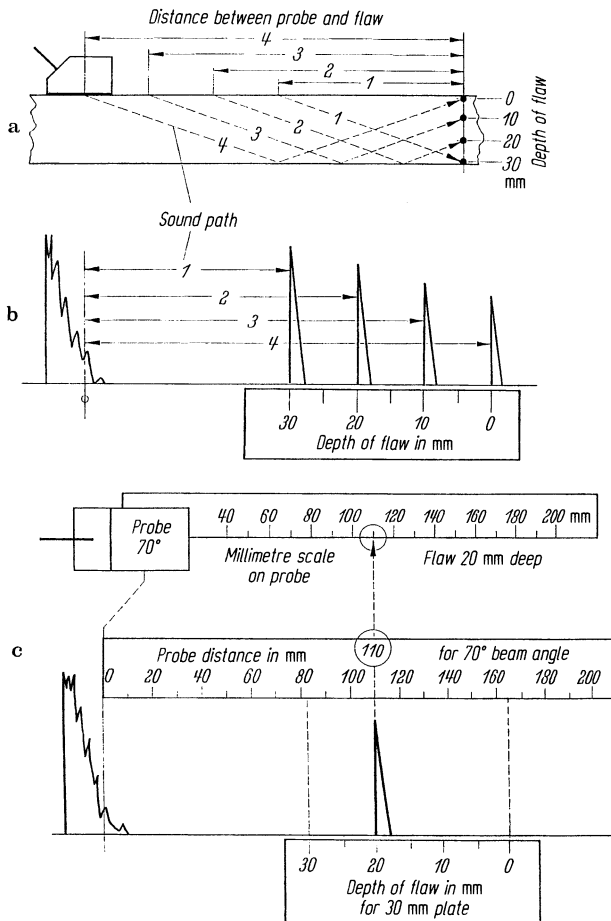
Flaw location in the testing of welds with CR-screen scale for flaw depth and probe distance, selected for a particular plate thickness and beam angle
